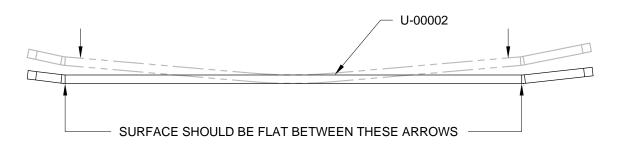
STRAIGHTENING THE WHEEL FAIRING BRACKETS
